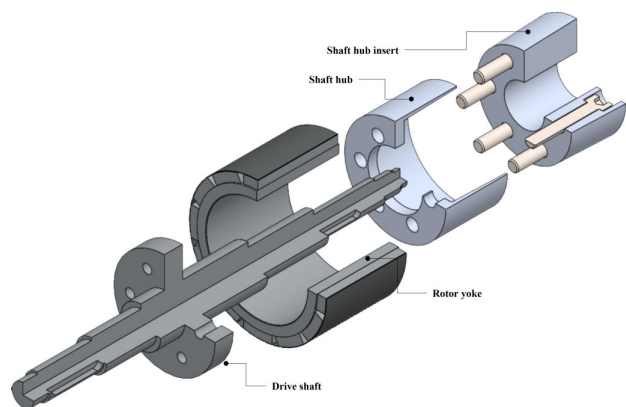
A rotor module consists of a drive shaft, motor rotor, shaft hub, and shaft hub insert.
